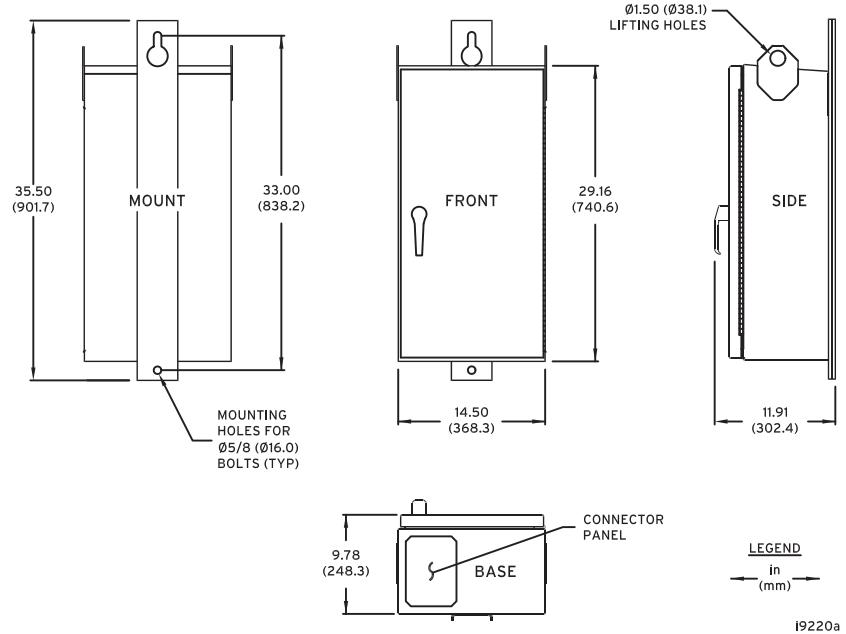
SEL-351RS Kestrel Enclosure Dimensions and Mounting Drill Plan (Swing Open Enclosure)
